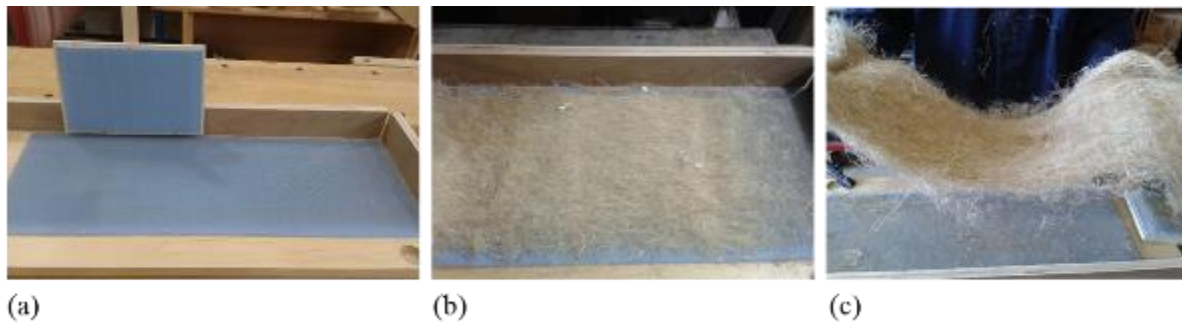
Aligning of hemp fiber using carding board and hand carder: (a) custom made carding board and hand carder, (b) carding of hemp fiber, and (c) aligned hemp fiber mat. Source: Sam-Brew 2015.
